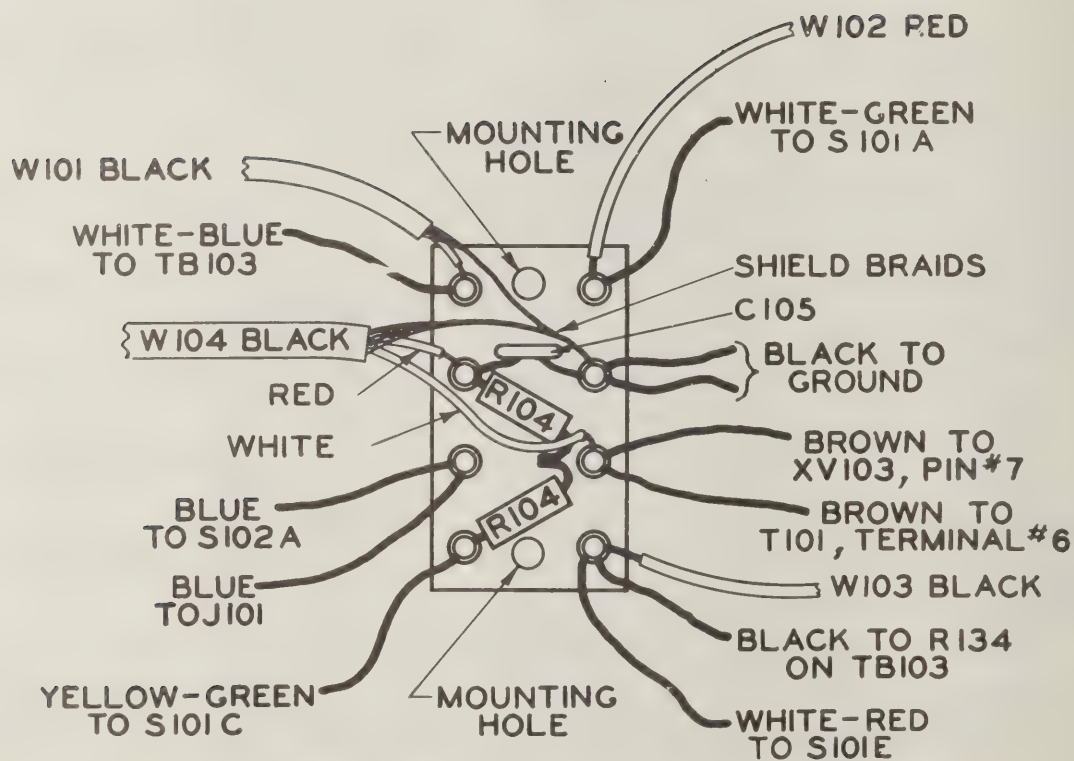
Location of Component Parts on Terminal Board TB-104.
